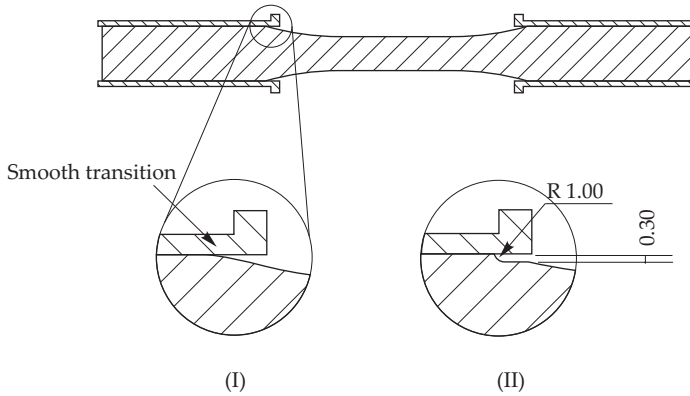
Specimen with steel bushings. (i) Area in which fretting fatigue occurred. (ii) Modified geometry to avoid fretting.
